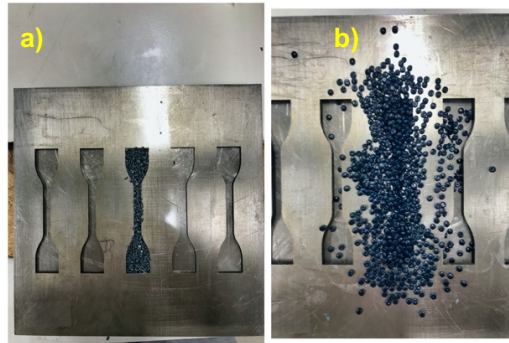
On the left (a) matrix mould with one groove filled with pellets before process was optimized for the material; on the right (b) matrix mould with one groove filled with pellets in excess around the groove profile after process was optimized for material.
